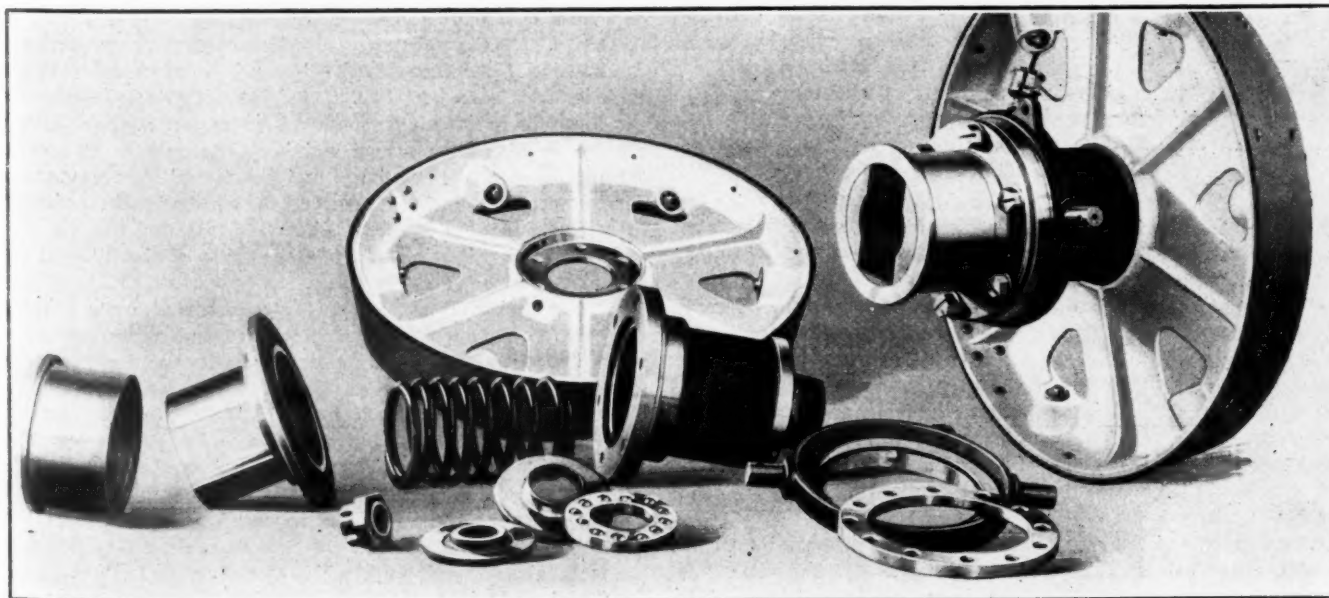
Disassembled view of the cone clutch. New on the Rambler car for the 1913 season
